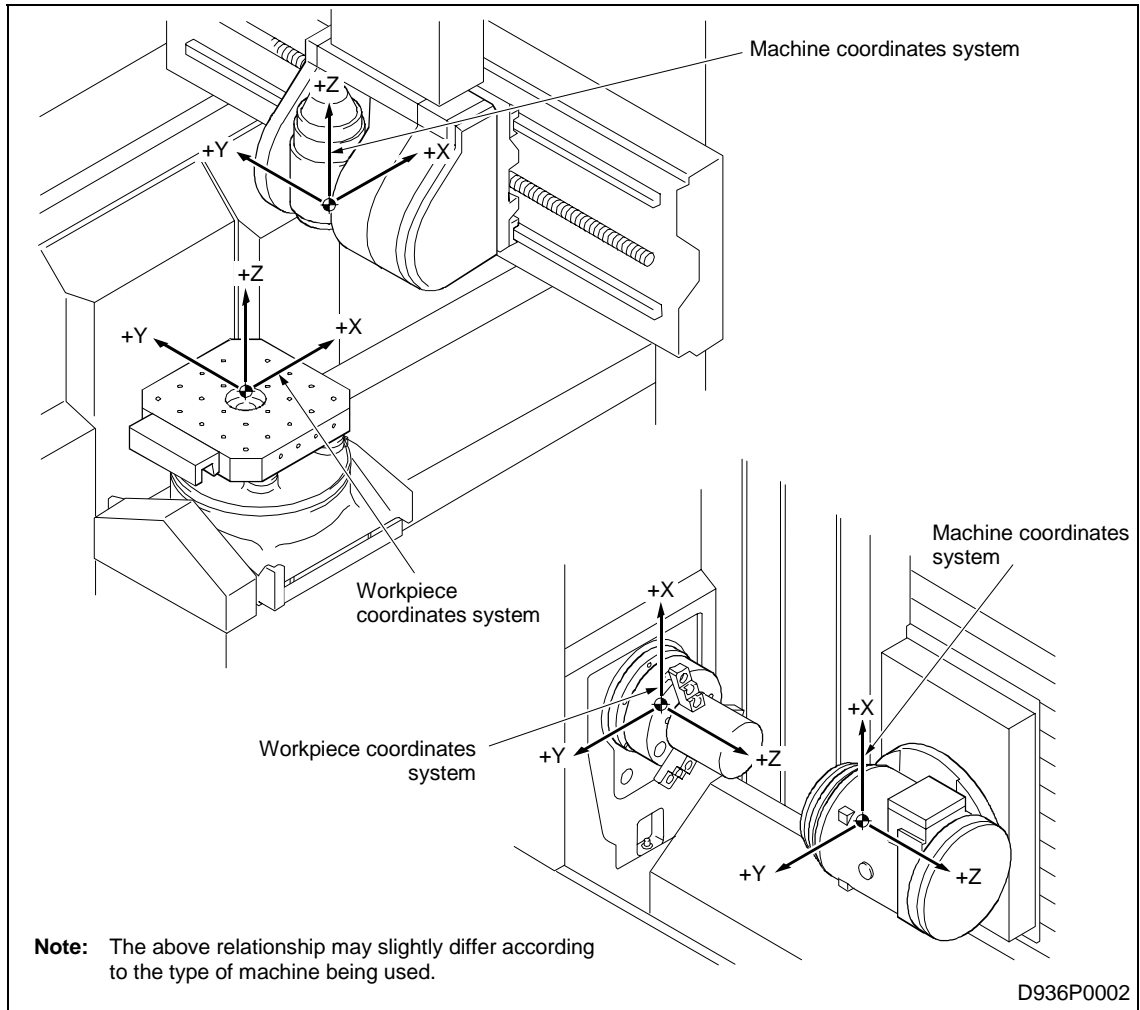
Machine coordinates system and workpiece coordinates system
